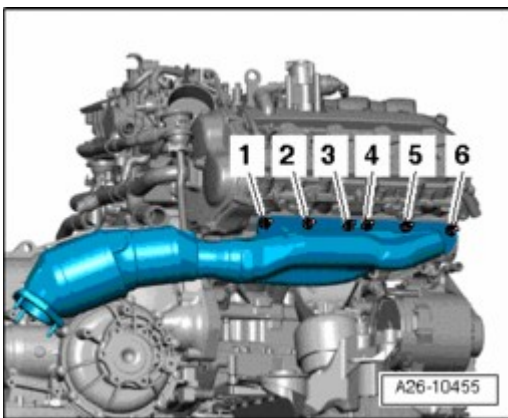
Removing Nuts And Right Exhaust Manifold With Catalytic Converter
